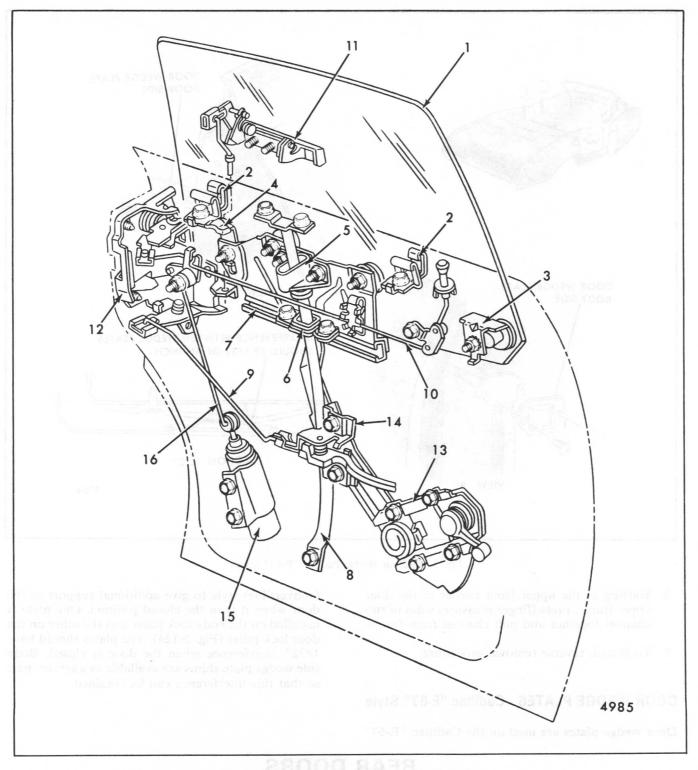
Rear Door Hardware - "A-29,35" Styles
